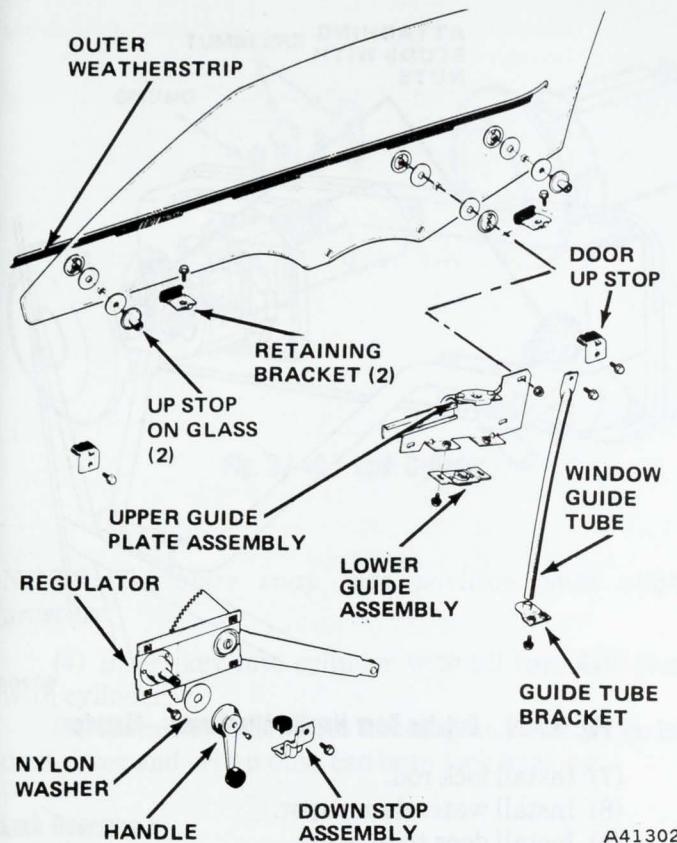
J-37 Glass Assembly and Attaching Parts—Matador Coupe
